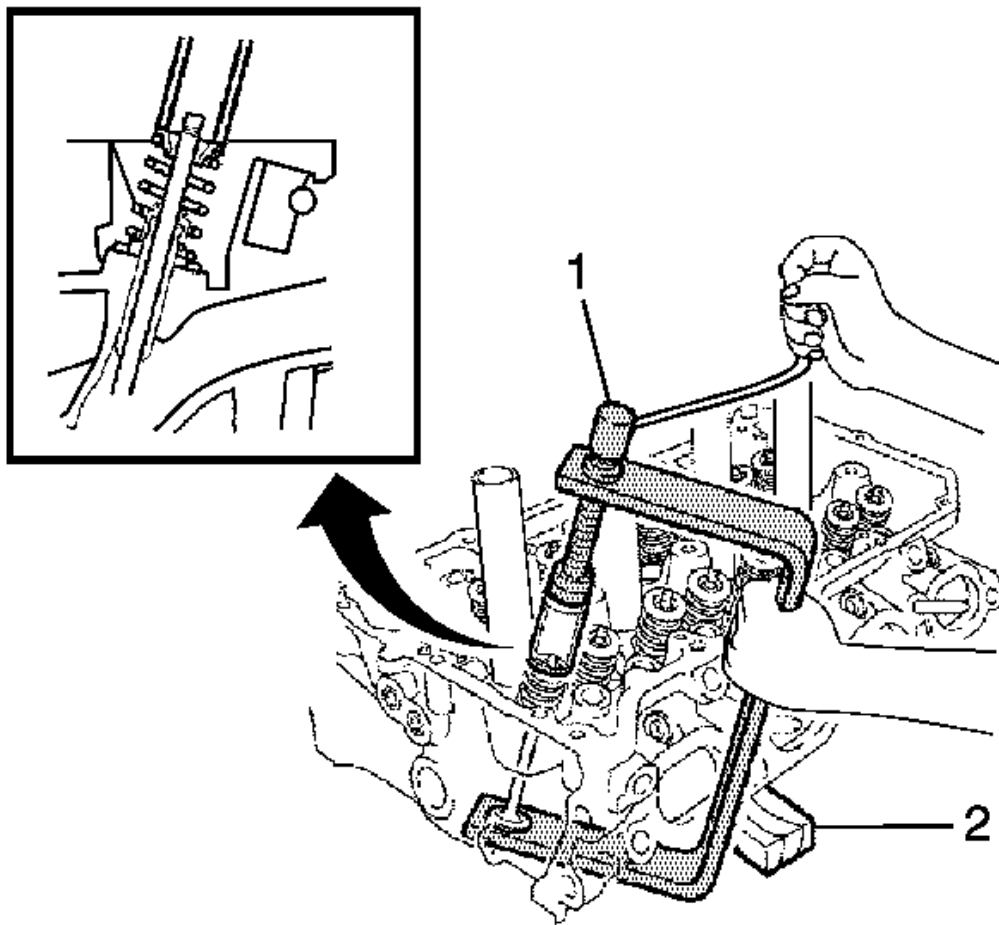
View Of Compressing Valve Spring & Removing/Installing Valve Retainer Locks
